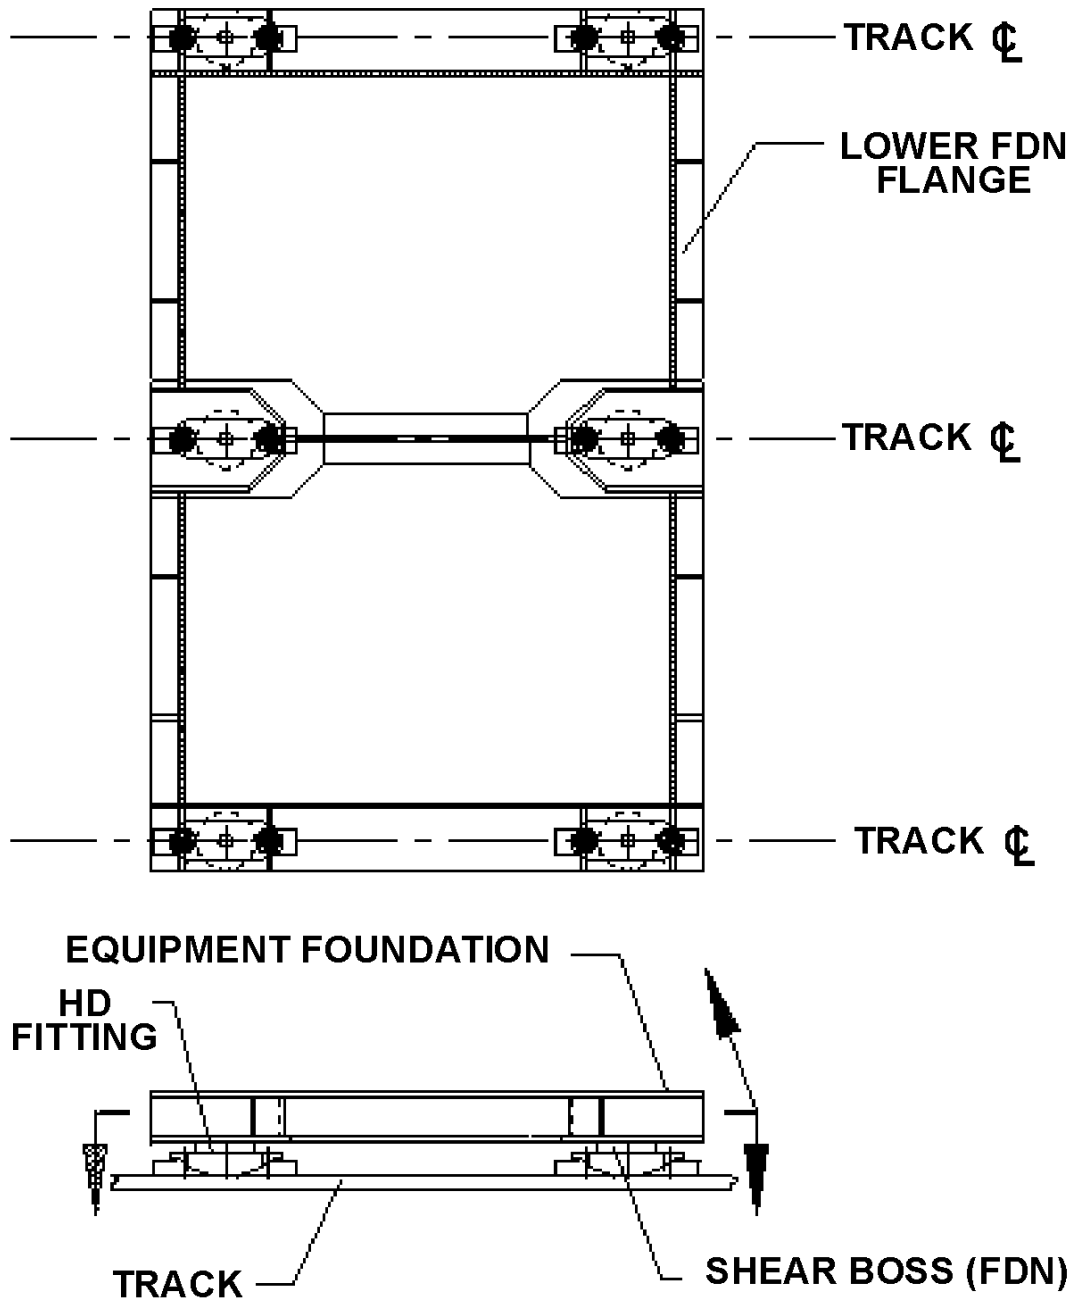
Typical Foundation on Heavy-duty Fittings
